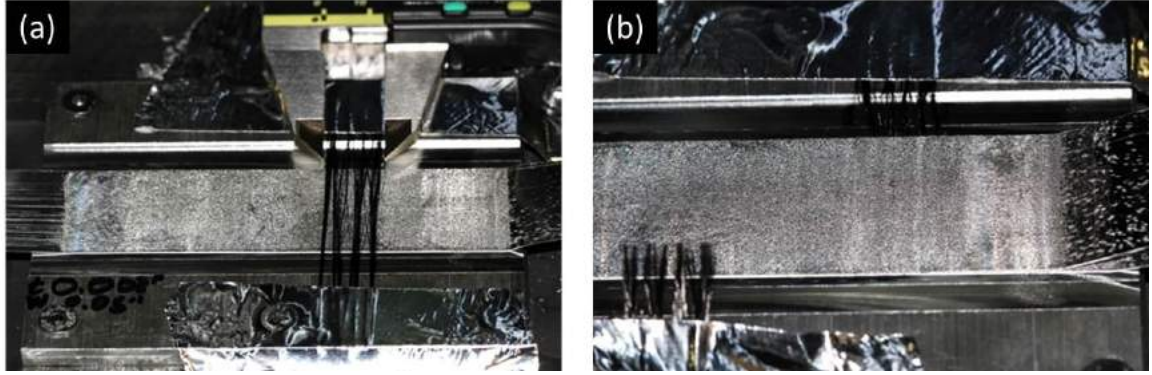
Embedding of a single CF bundle spread out and oriented perpendicular to tape feed. (a) Before embedding. (b) After welding one layer of tape over fibers.
